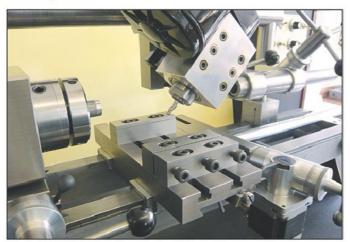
Milling head on its topslide on the mounting table - vice on cross slide.
